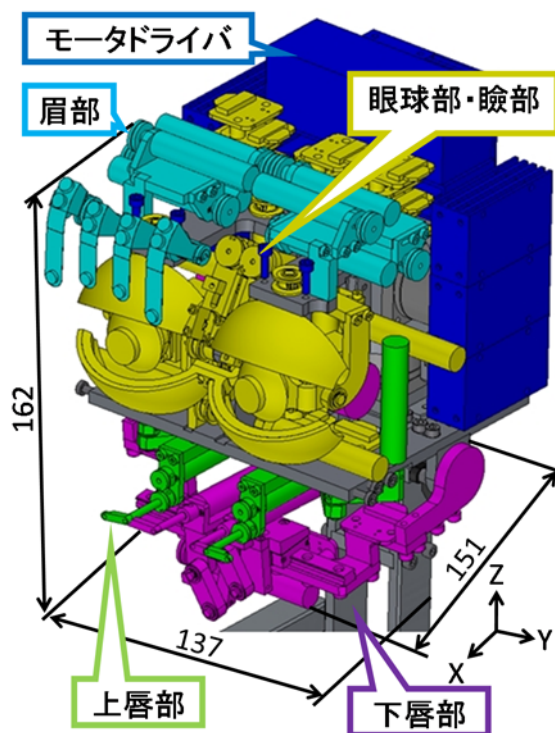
56 CAD drawing of the mechanism of KOBIAN-R head
